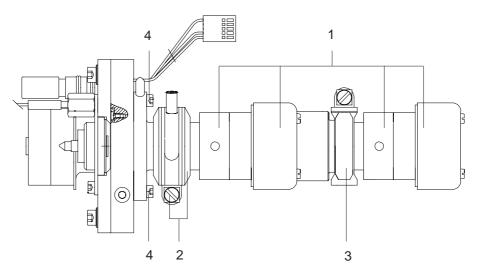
Photometer Assembly (2 - channel photometer, side view)
